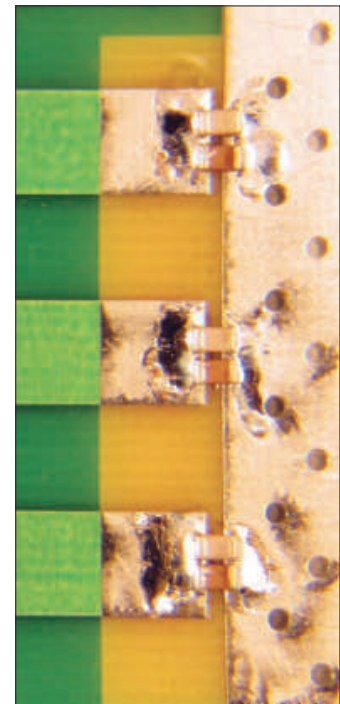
At each of the three ends of this printed comb-line filter are two chip capacitors in parallel to reduce loss.
